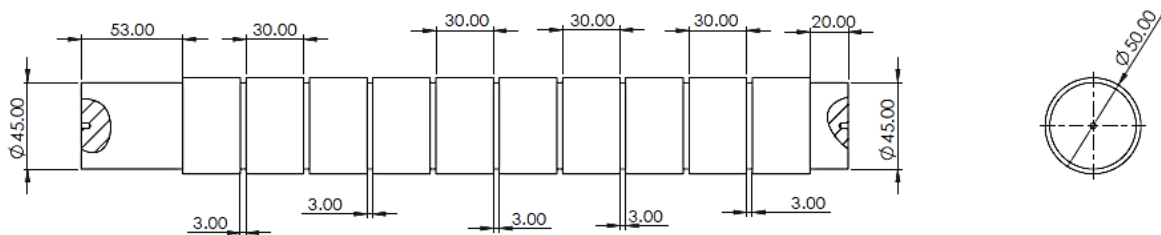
Workpiece construction showing the workpiece diameter and sectors.
